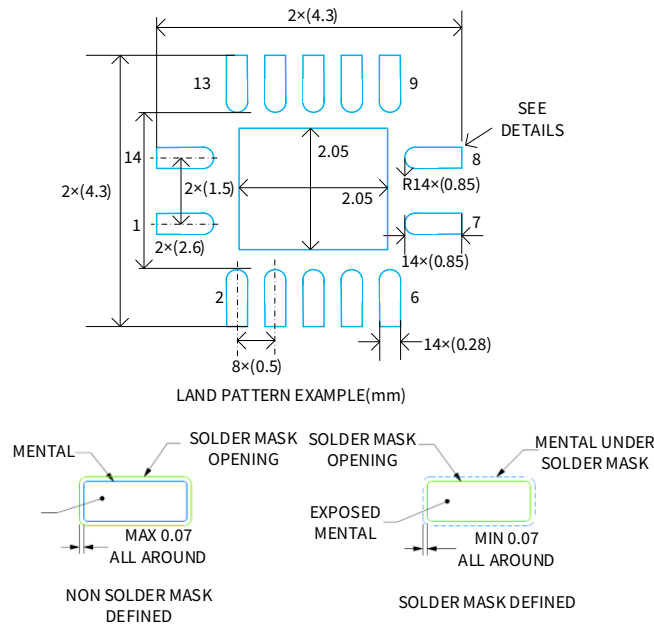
VQFN14 package board layout example for NCAB0104-Q1QBCR
